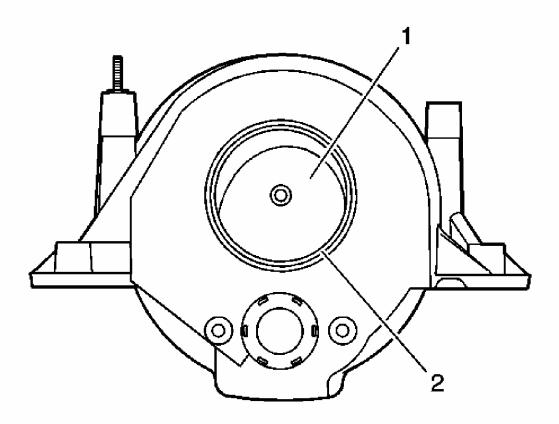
Inspecting Front Intake Manifold For Damage To Passage & Plenum
